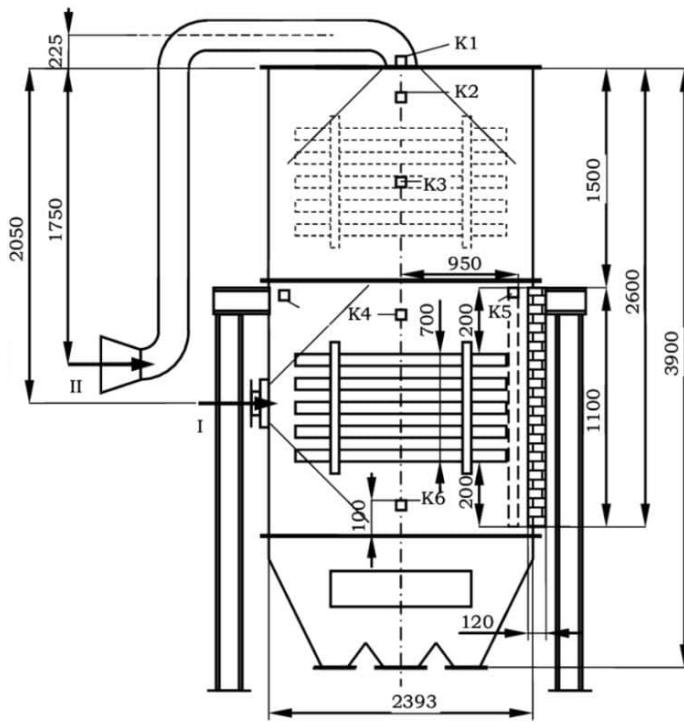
Dimensions of high pressure boiler (scaled to half the dimensions in mm)
